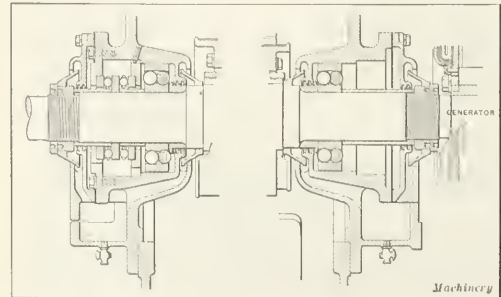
Diagram showing Mounting of Motor-generator Sets
